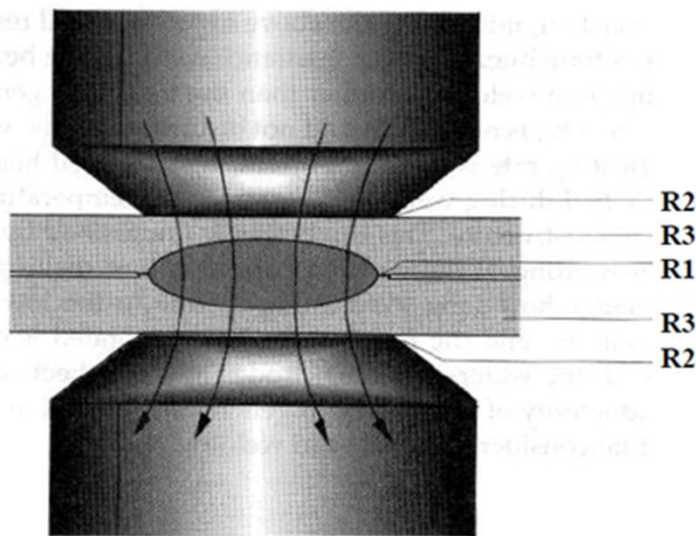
Schematic diagram of resistance spot welding [2]
